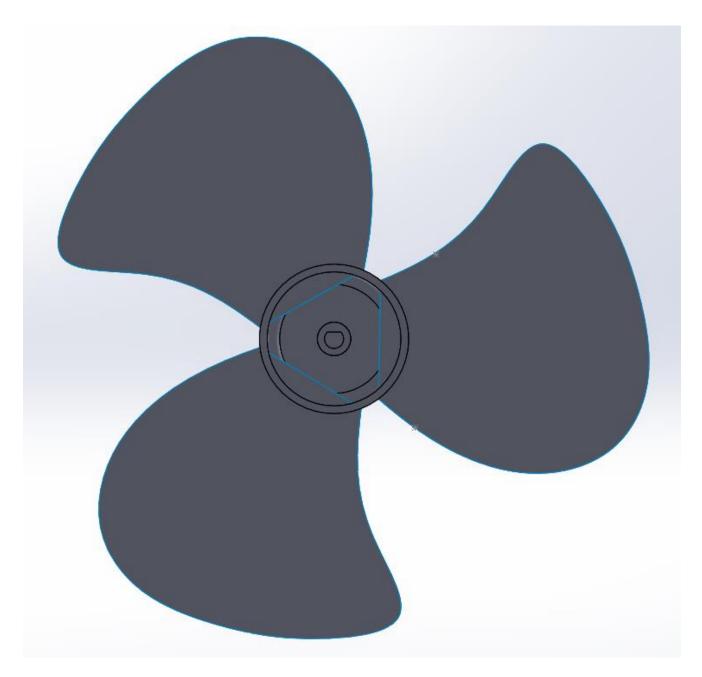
Bottom View of Reverse Engineered Model of Propeller
